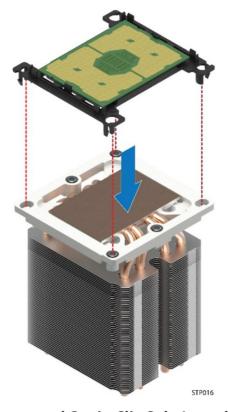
Processor and CarrierClip Sub-Assembly to Heat Sink
